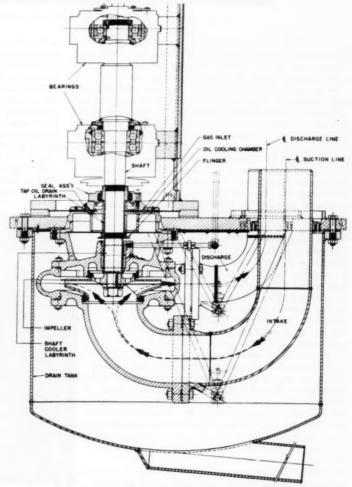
SECTION THROUGH ALPLAUS MECHANICAL PUMP FOR GENIE HEAT-TRANSFER SYSTEM; 400 GPM, 126 FT HEAD
